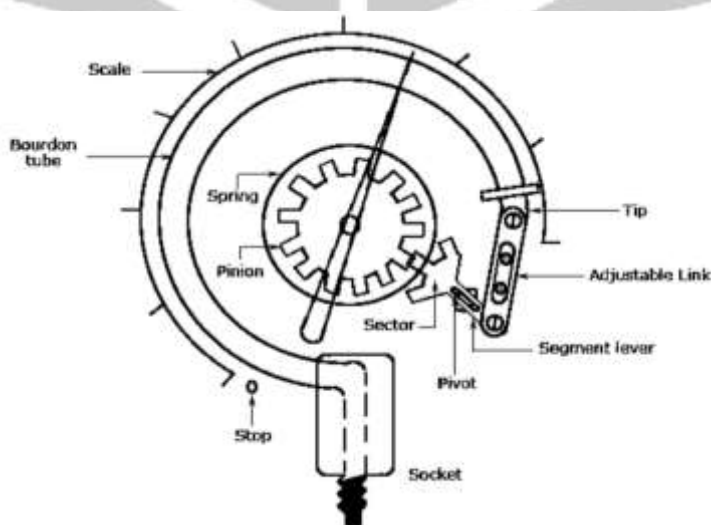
C shaped Bourdon Tube Pressure Gauge
